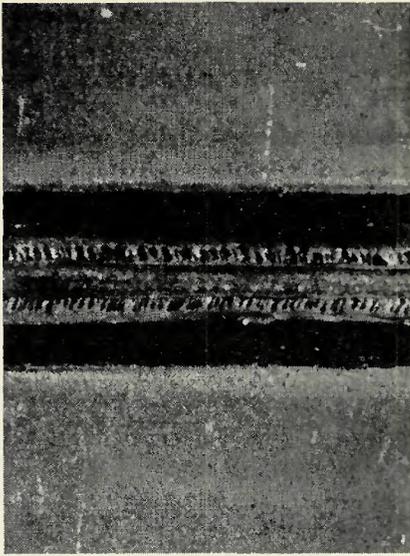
Broken cruciform tensile specimen. Plate coated with 0.0025 in. (0.001 mm) zinc rich primer. Welded by submerged arc process
